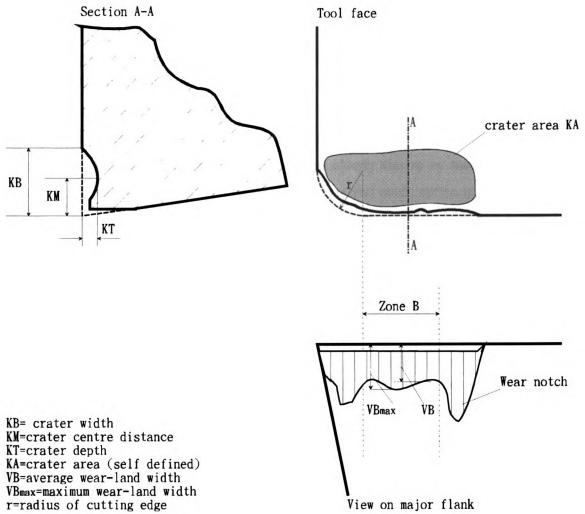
Zones of damage of the cutting tool due to machining
